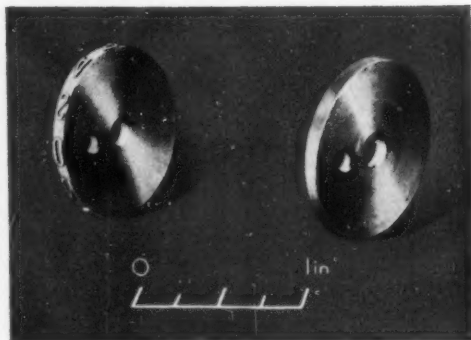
A Typical Steel Printing Wheel and the Blank from which it is Produced. The Raised Characters on the Wheel are Formed by a Rolling Technique on a Milling Machine which has been Specially Equipped by the Company
